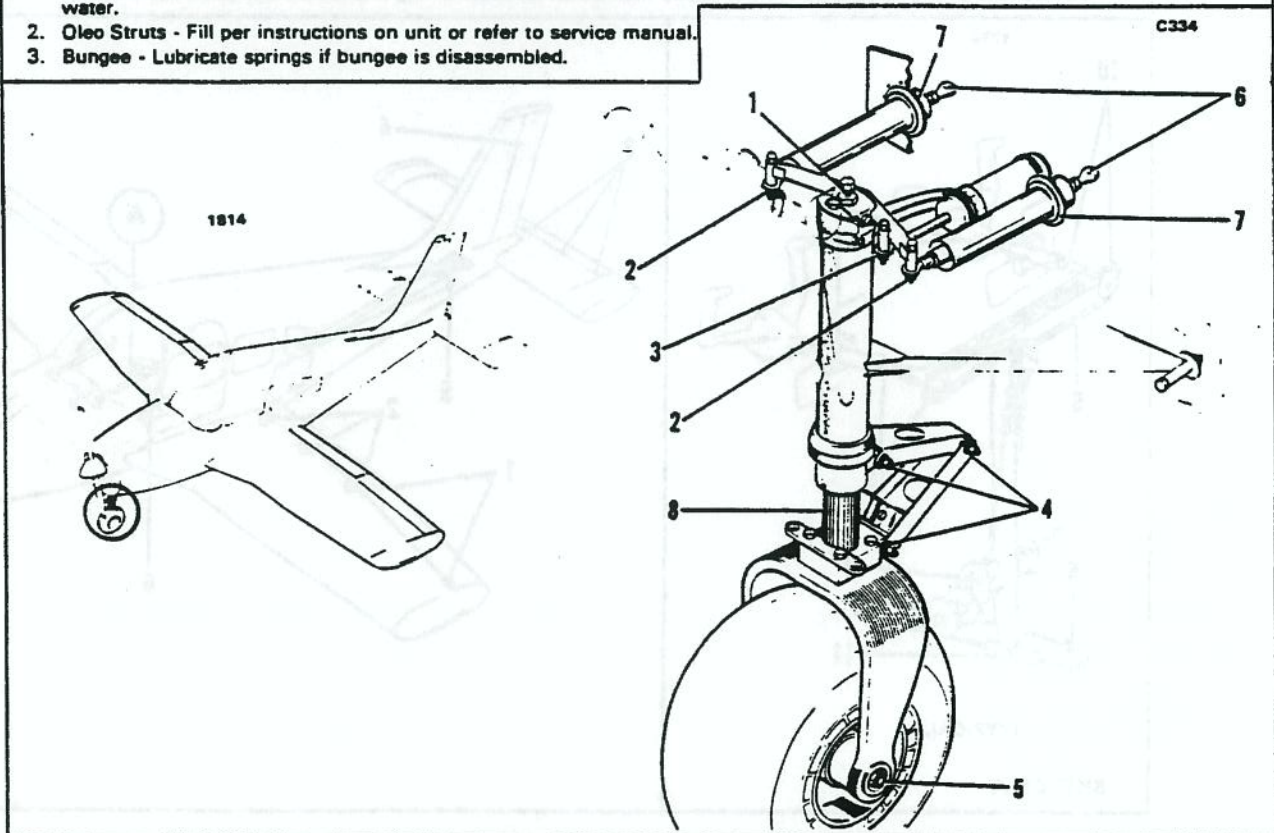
Lubrication Chart (Landing Gear. Nose)
